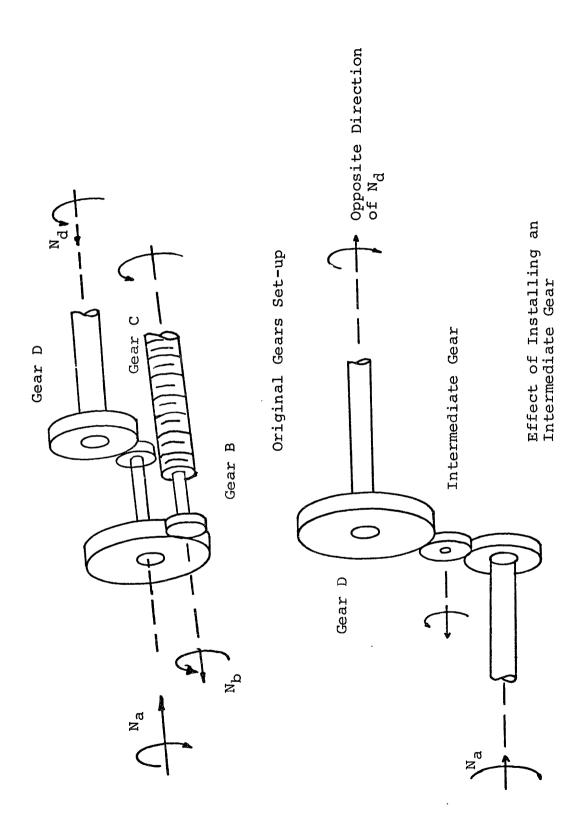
Gear Set-up for the Wire Wrap Machine
